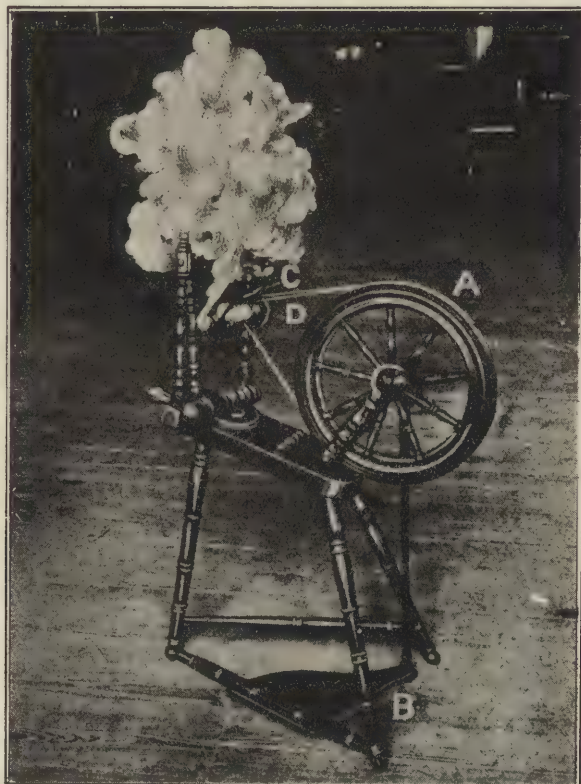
Double-grooved Wheel A; Pedal B; Flyer C;
